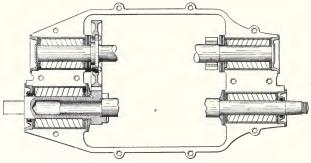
Hyatt Roller Bearing as Used in Transmission Case. Hyatt Roller Bearing Company, Harrison, N. J.
